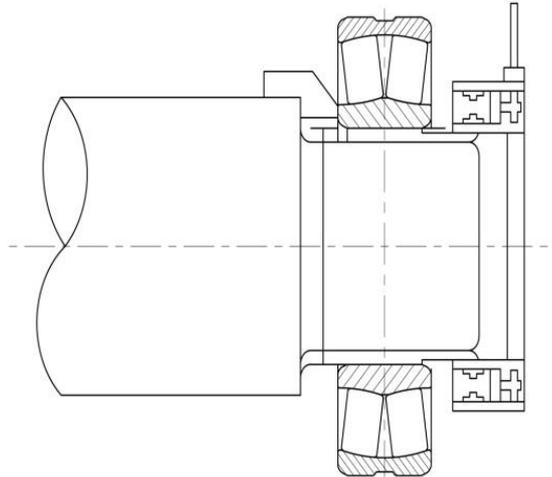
Removal of Withdrawal Sleeve Using Withdrawal Nut (1)
